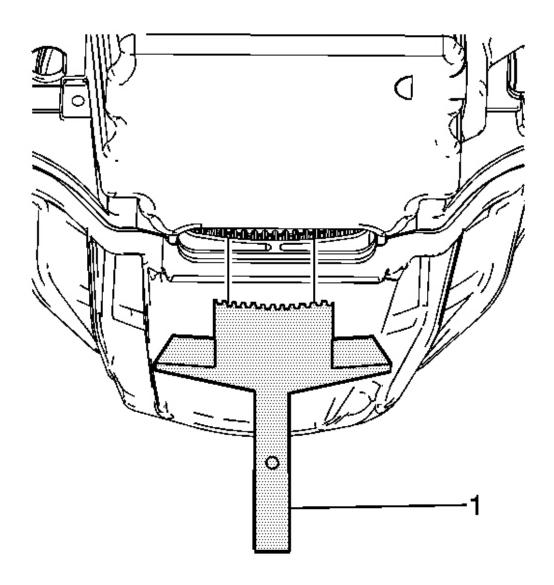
View Of EN 46547 Flywheel Holding Tool Courtesy of GENERAL MOTORS CORP.
